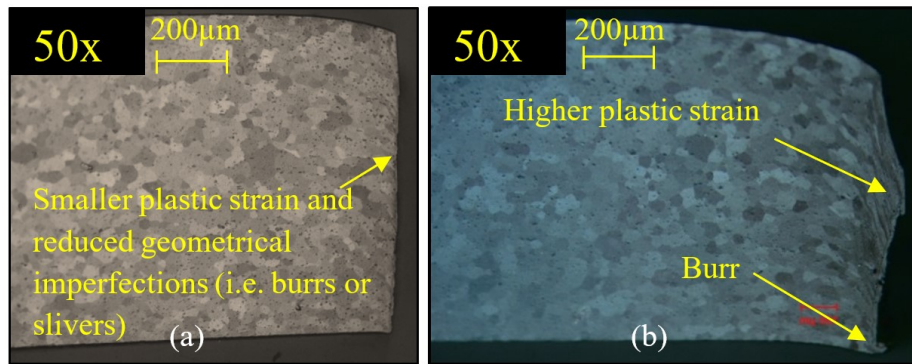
(a) Laboratory 0.9 mm 6DR1 aluminum sample trimmed with conventional sharp trimming conditions at 50x magnification. (b) Production 0.9 mm 6DR1 aluminum blank trimmed with dull upper at 50x microscopic cross-sectional.
